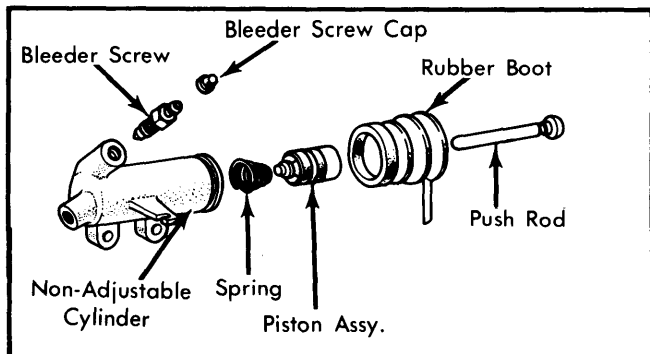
Exploded View of Slave Cylinder Celica, Corolla, Corona Shown
